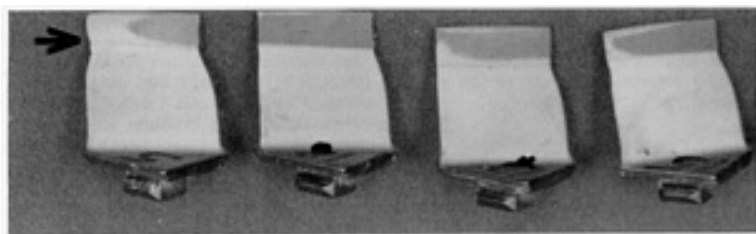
Rear-stage compressor blades illustrating the low-impingement-angle erosion mechanism. Arrow indicates lost erosion coating on blade trailing edge.
